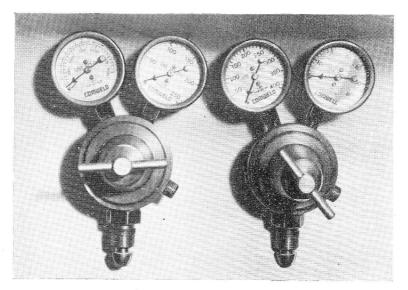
(a)—Oxygen Regulator, right hand thread. Fig. 4 (b)—Acetylene Regulator, left hand thread. In the case of oxygen and where high pressure dissolved acetylene is used it is readily apparent that the gas must be delivered to the torches at appropriately reduced and constant pressures. This is achieved by applying to each cylinder a regulator each of which is equipped with two pressure gauges, one to inform the operator of the pressure of gas in the cylinder and one to show the reduced pressure at which the gas is being delivered through the rubber tubing to the operating torch. Essentially the regulators complete with gauges are the same both for oxygen and acetylene except that in the case of those intended for oxygen the connections to the cylinder are right hand male and are coloured black, whilst those for acetylene have the connections to the cylinder left hand male and are painted maroon. See Figs. 4 (a) and 4 (b), page 10.
